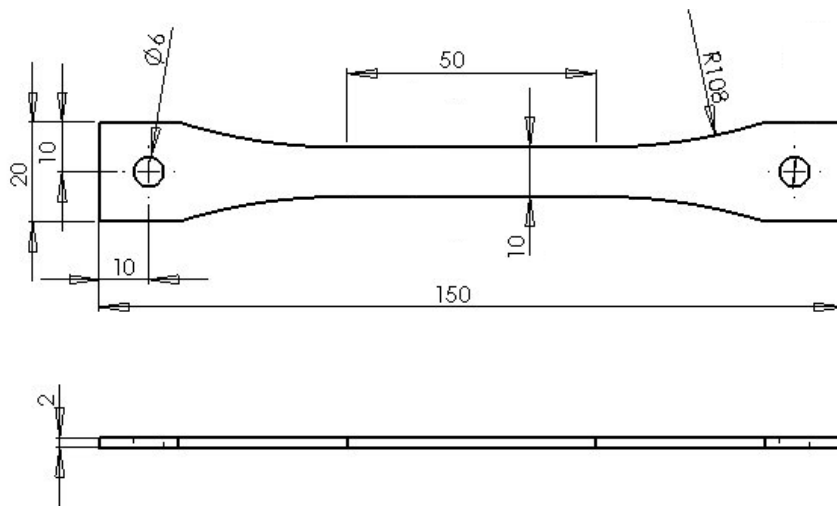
Tensile test specimen geometry bulk specimen (dimensions in mm).
